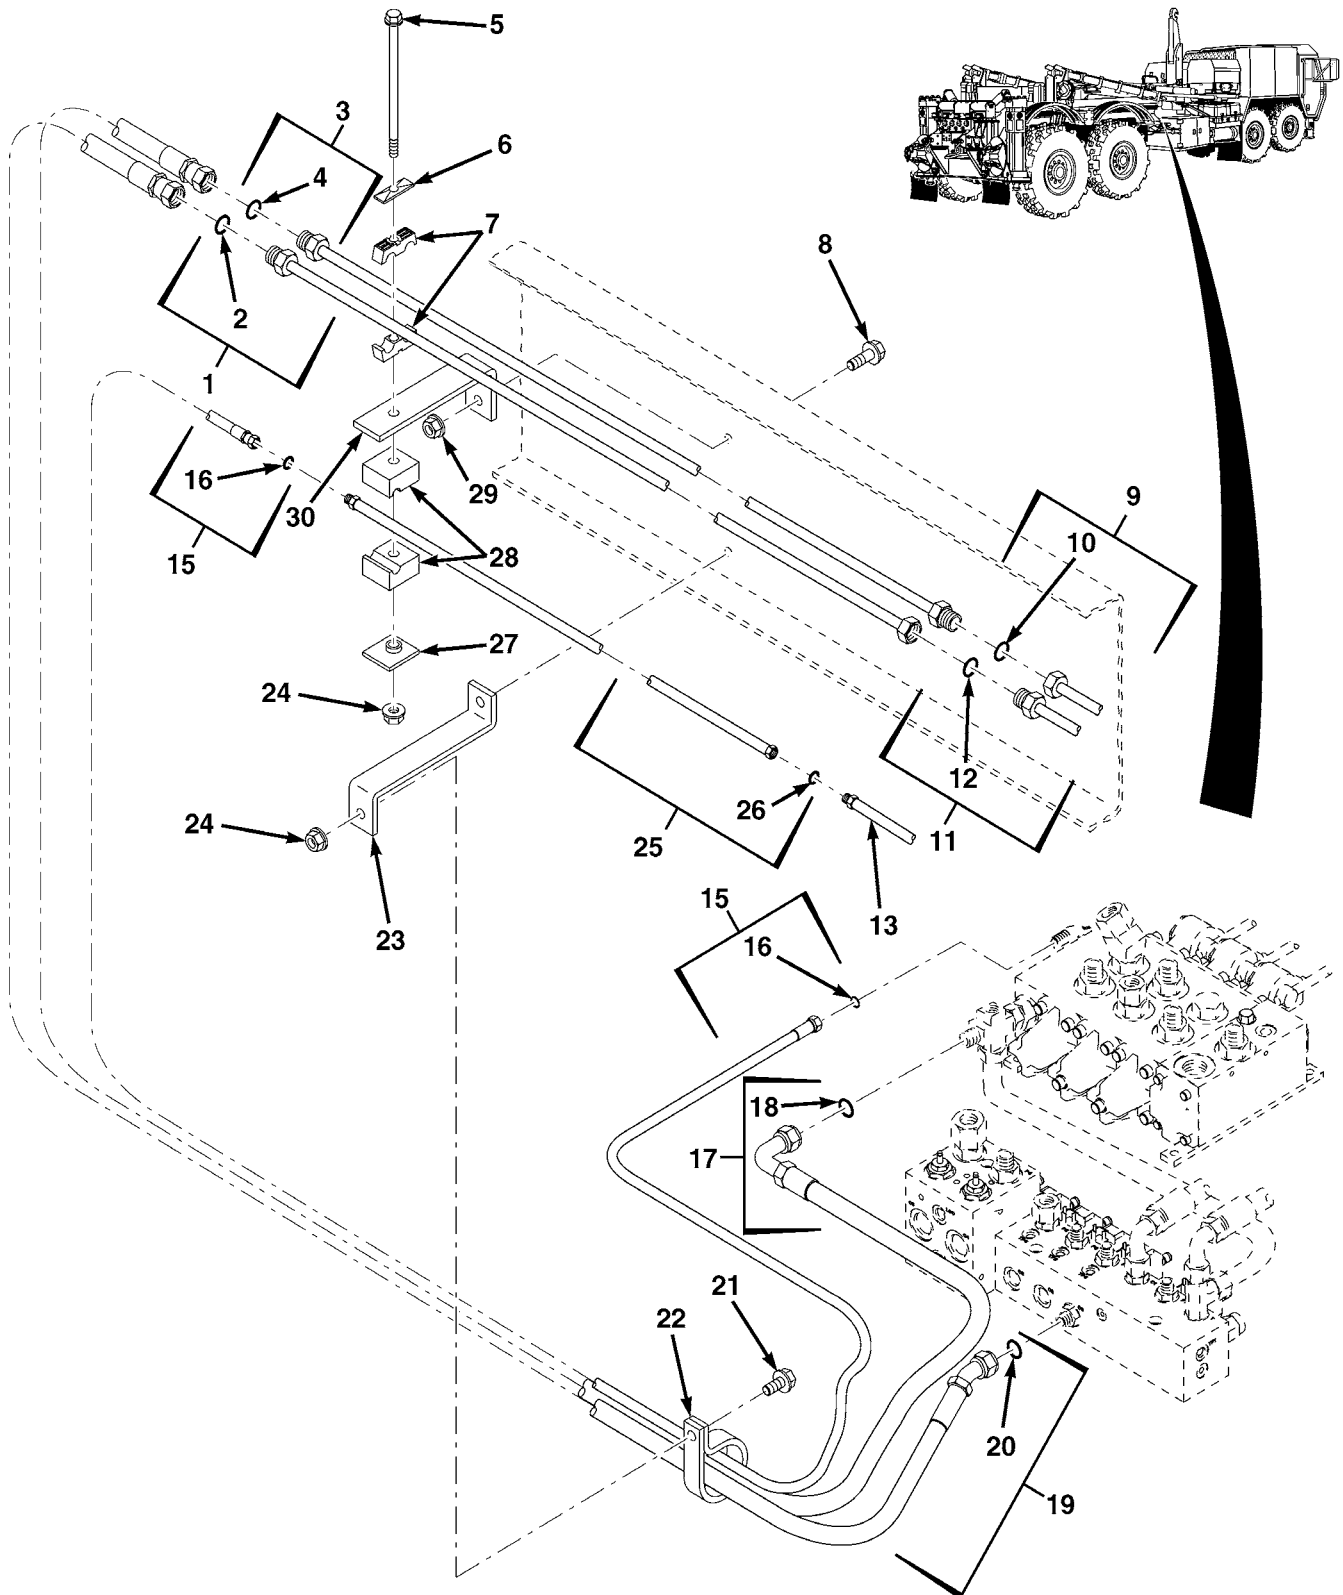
OUTRIGGER HYDRAULIC LINES AND FITTINGS (SHEET 1 OF 4)
